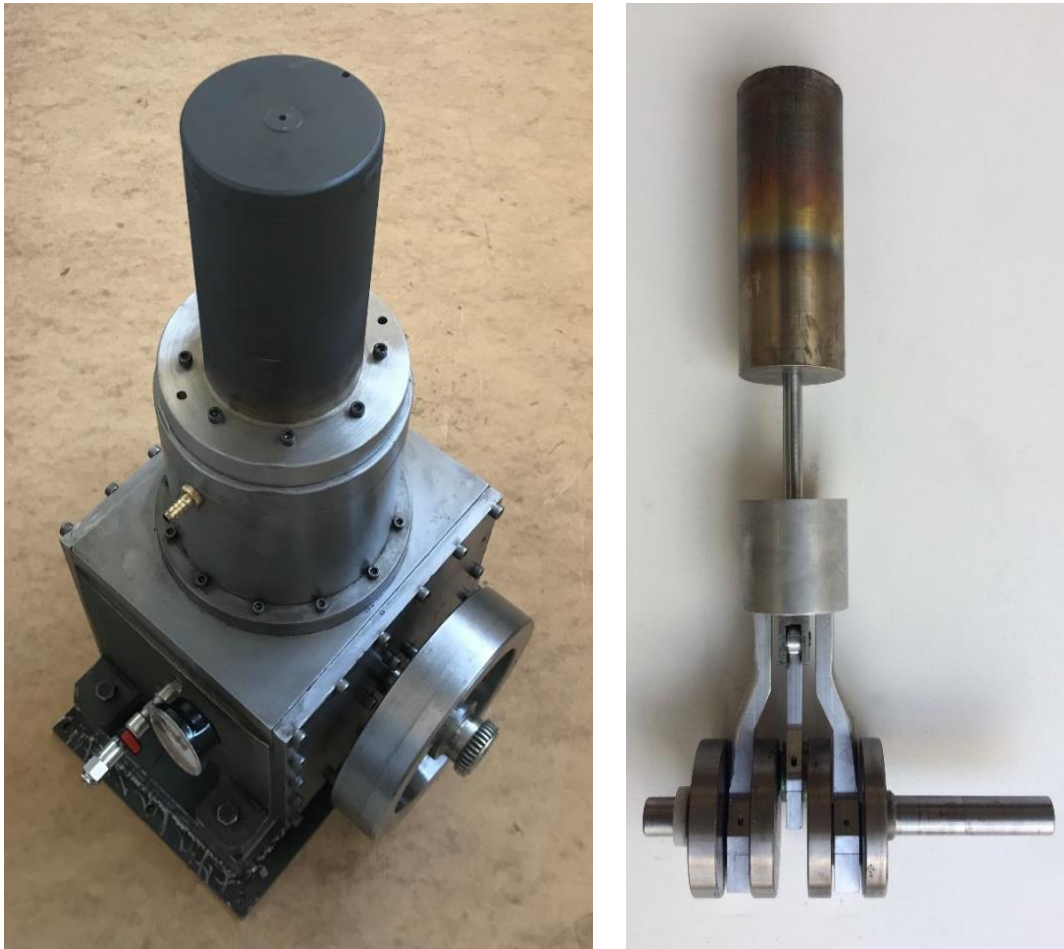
Assembly views of the prototype Stirling engine with a slider-crank mechanism
